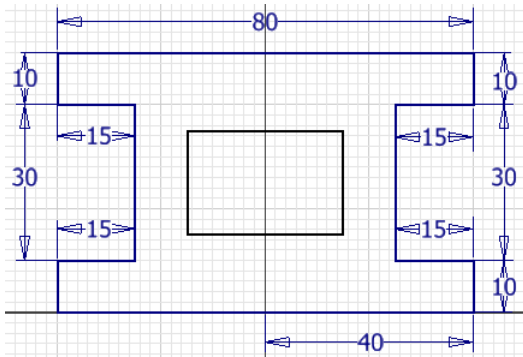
(g) Rectangle drawn using 2-Point Rectangle tool
